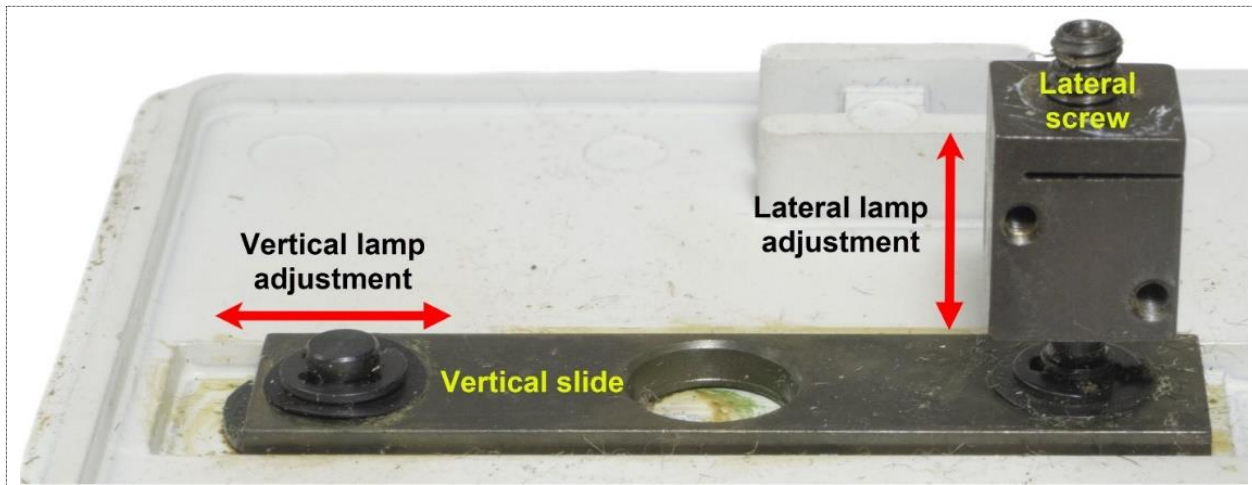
The lamp adjustment mechanism. The E clips on top of the adjustment controls have been removed in this image.
